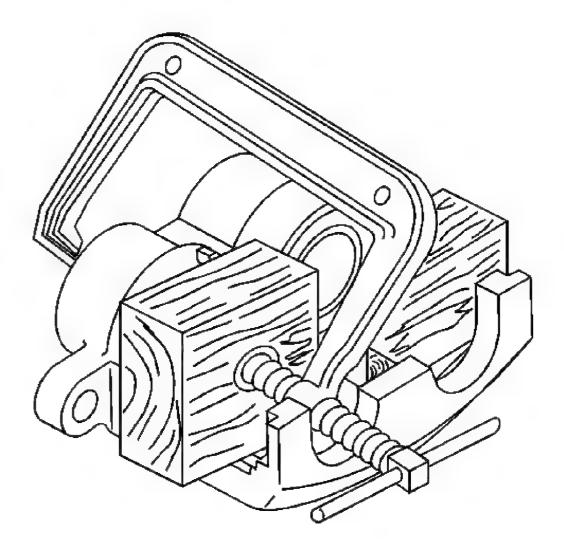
Clamping Brake Caliper Courtesy of GENERAL MOTORS CORP.
